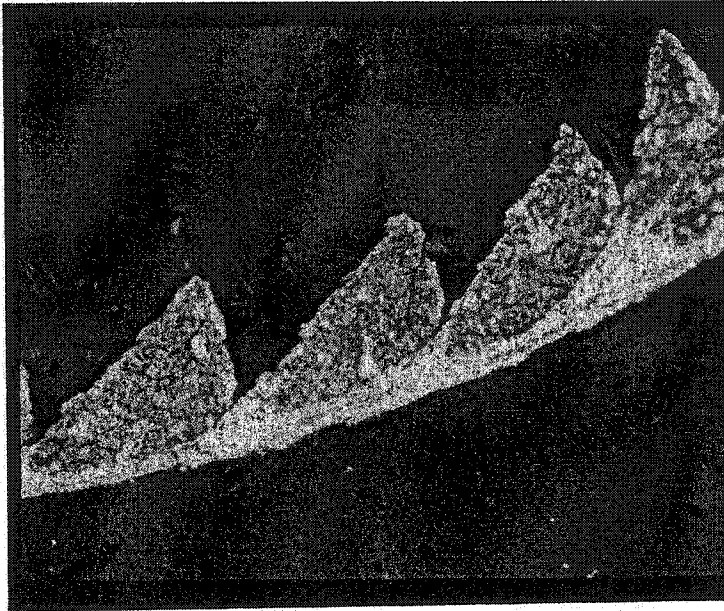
b. Micrograph of chip formed during cutting D2 with a sharp cutting edge. (N=10000 RPM, ADOC =0.625 mm, f=0.1016 mm/tooth, 38 mm diameter high volume fraction CBN ball end mill).
